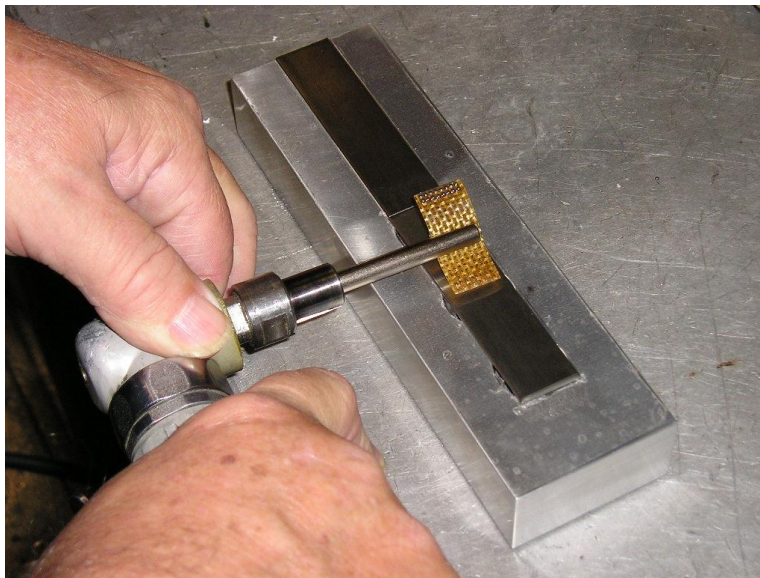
Right Angle Grinding Tool with Peening Flap Installed and Rotary Tachometer
